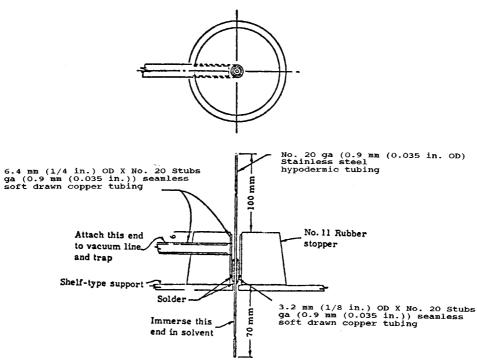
Cleaner Assembly for Bingham-Type Pycnometer
